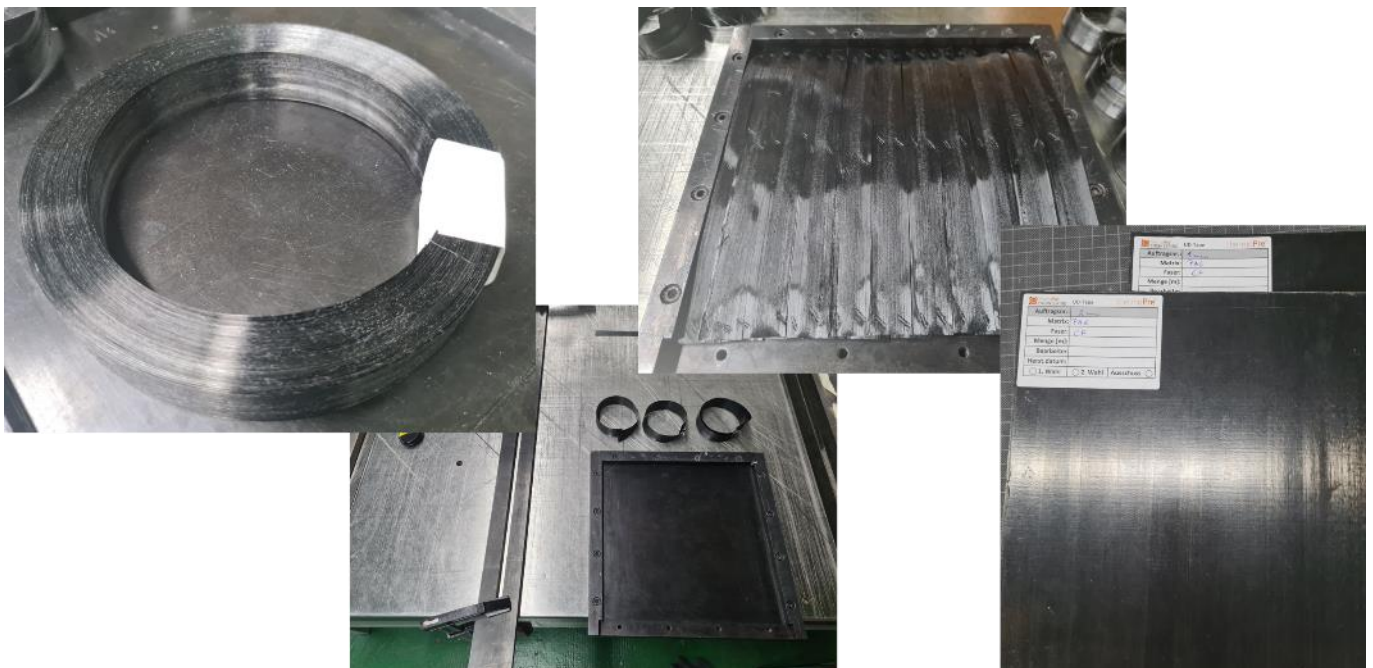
Manufacturing process of the test panels, from left to right: UD tape with modifiers, cutted tapes and pressing tool, UD tapes placed in the tool and thermally fixed, finished pressed panels
